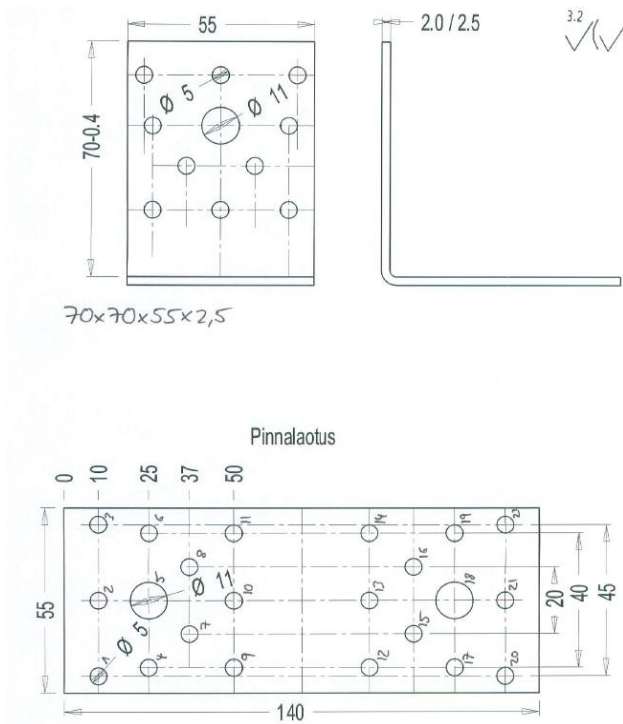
Dimensions of angle bracket 70x70x55x2,5
